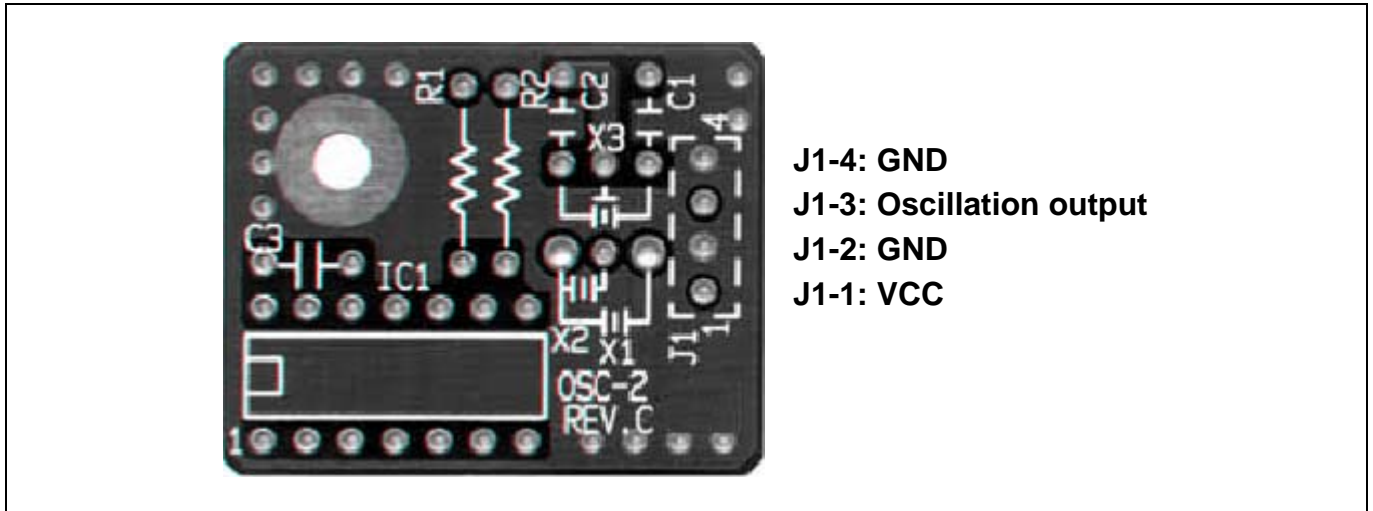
External view of the oscillator circuit board OSC-2 and its connector pin locations
